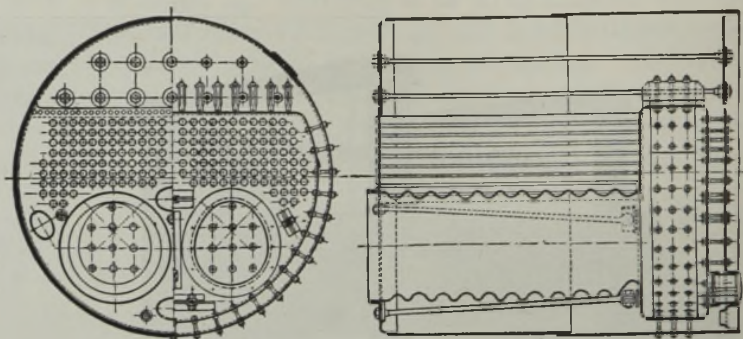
Cross section of Scotch marine boiler with steel combustion chamber. In the largest ones, furnaces are provided at each end opening into a common combustion chamber in the middle of the boiler.
